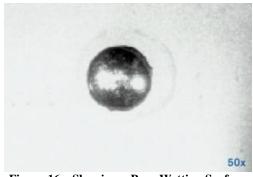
Showing a Poor Wetting Surface with a Smaller Spread of Molten after Reflow
